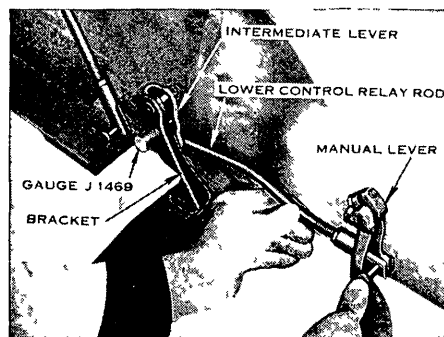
Adjusting manual control relay rod, 1946-52 Hydra-Matic
